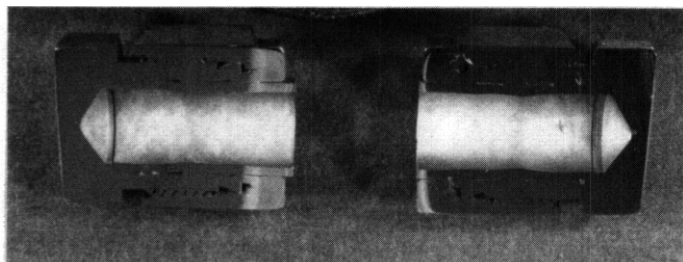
Cross section of V-20Ti capsule (inside) that was encapsulated in a stainless steel capsule (outside) after sectioning to remove the specimens
